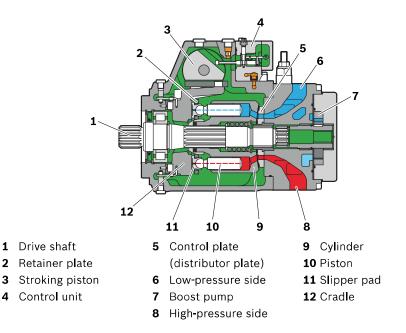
Section view of a swash plate axial piston pump [16], with description of internal parts.
